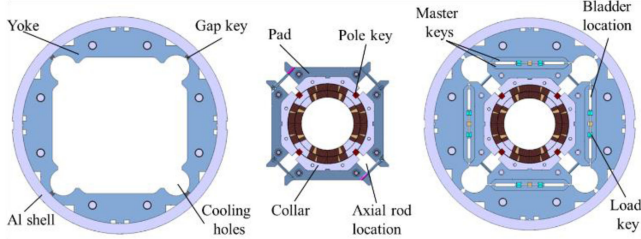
The 3 steps of the MQXF magnet assembly: shell-yoke sub-assembly (left), coil-pack sub-assembly (center), and the magnet assembly (right).
